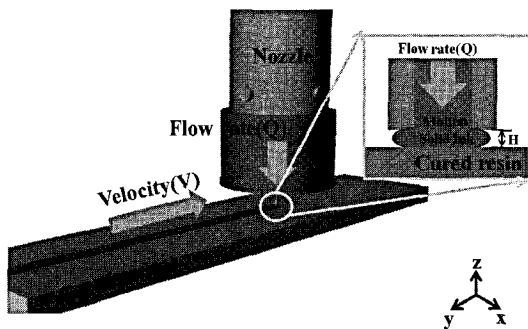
Schematic of molten solid ink extrusion on cured resin using nozzle
